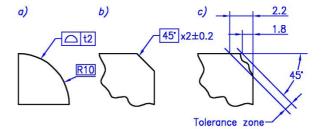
Examples of unambiguous specification of: a) radius, b) chamfer, c) interpretation of chamfer tolerance
